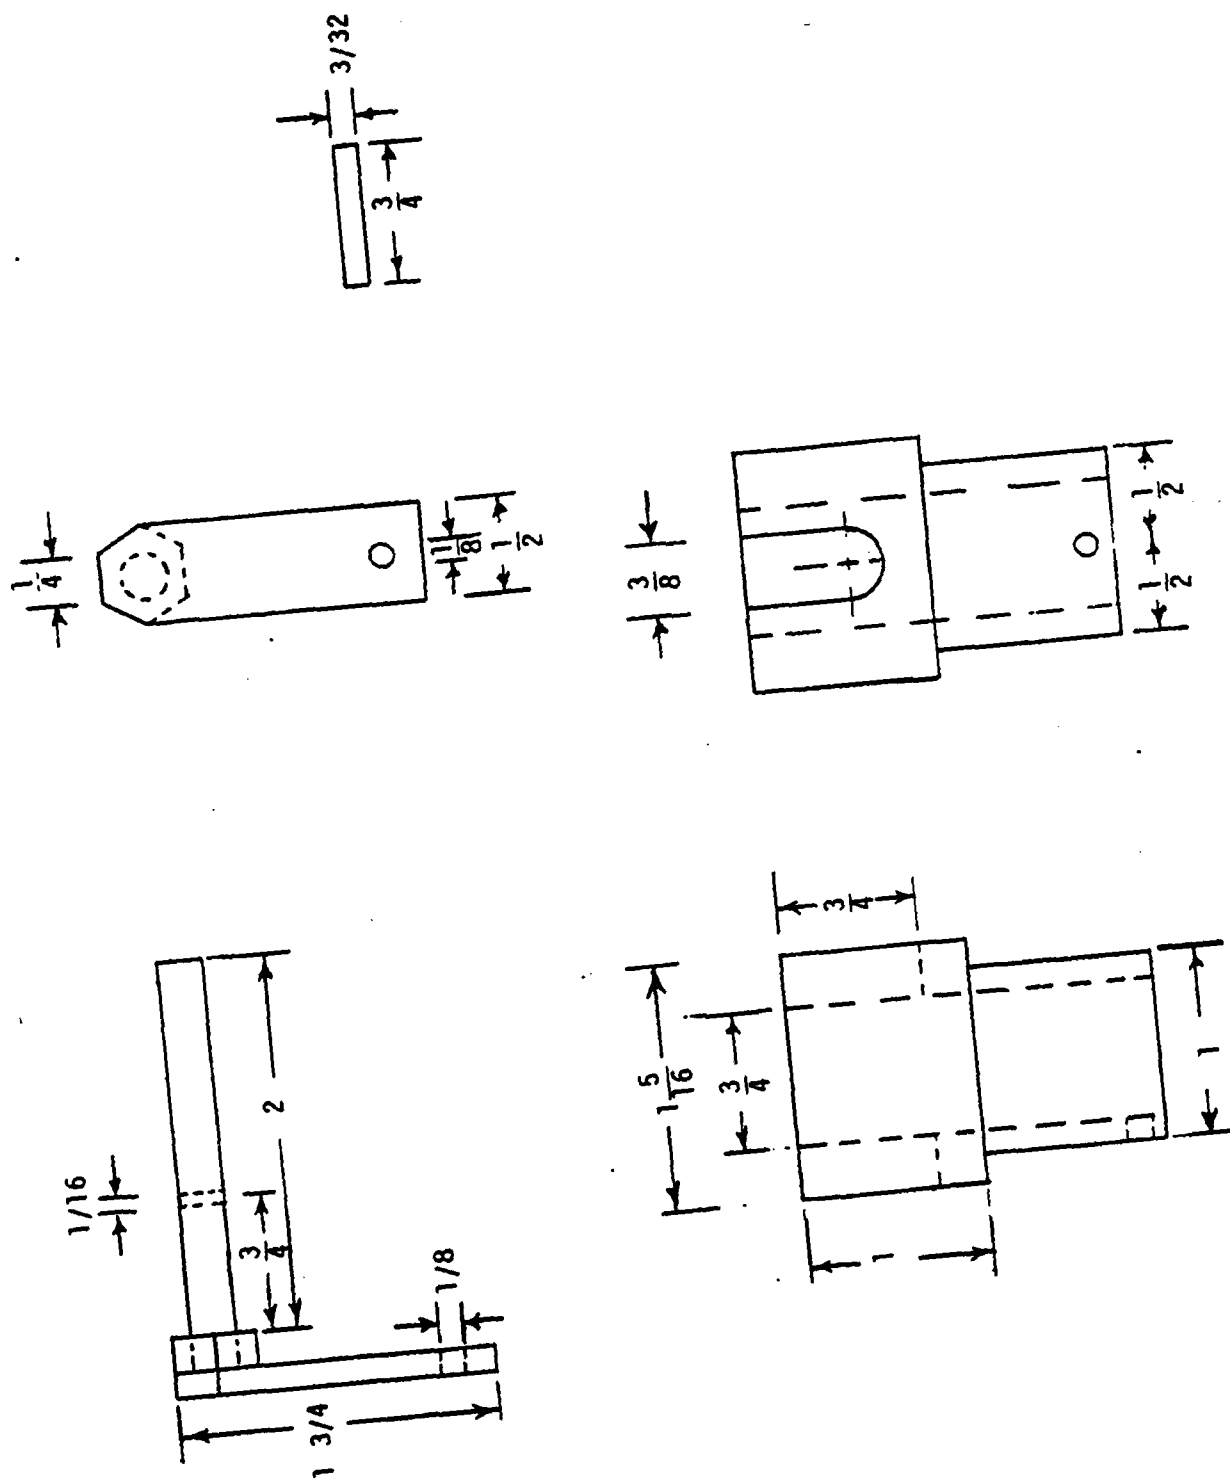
Hinge component parts used in the spring prestressing assembly.
